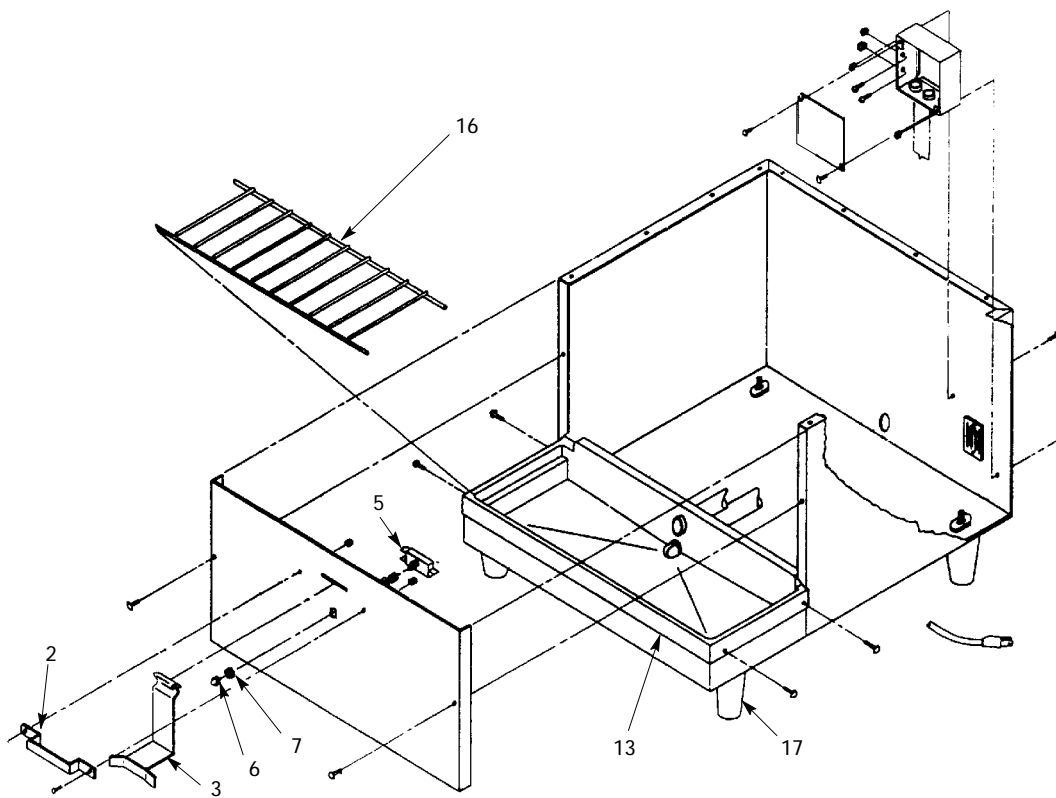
EXPLODED VIEW LOWER SECTION TJ45
